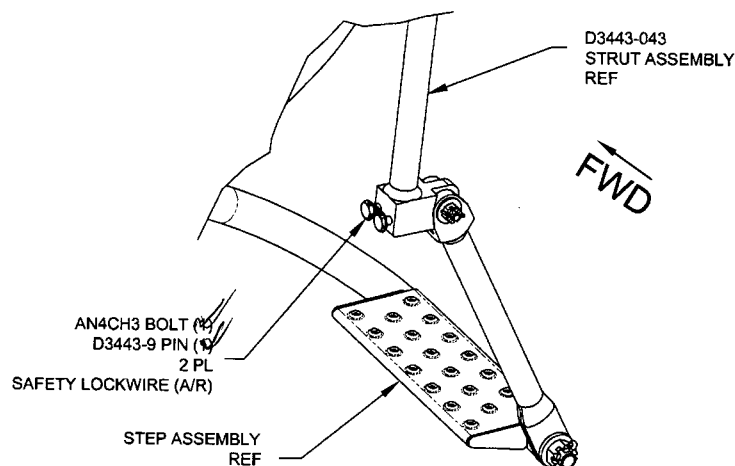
Detail Safety Wiring, D412-630-032 RH, Pilot/Co-Pilot Folding-Step Installation (Shown)
